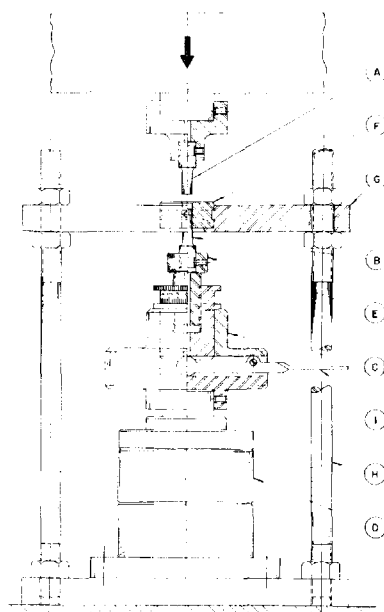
Fixture for compressing particulate solids. Key: A, upper punch; F, die; G, metal plate; B, lower punch; E, threaded bushing; C, flange holding lower punch; I, lifting lever; H, steel rods; D, compression cell.
